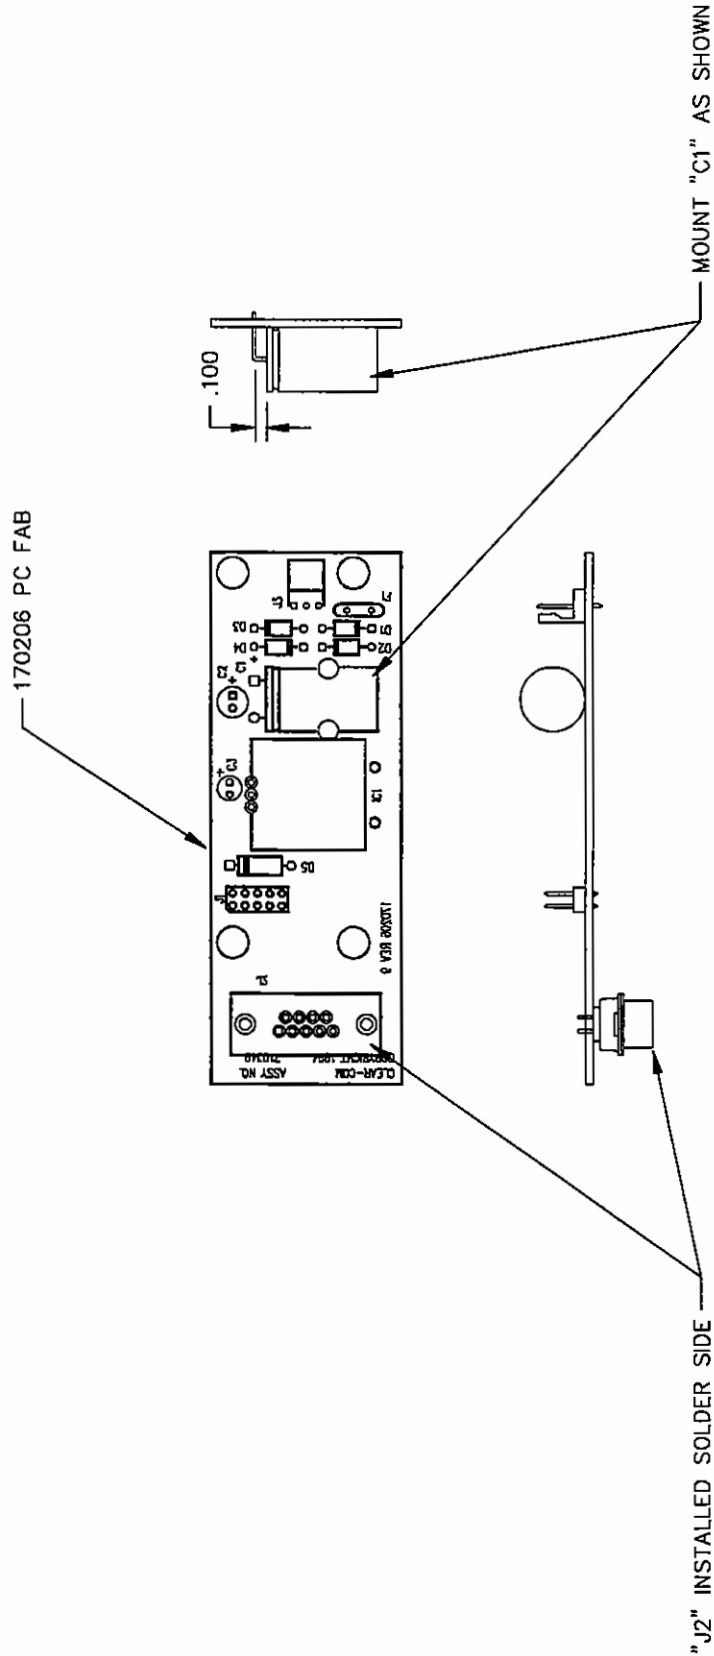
Assembly Drawing - XPL-12 (10 Key Panel w/ Electronic Labels) Rev. A
